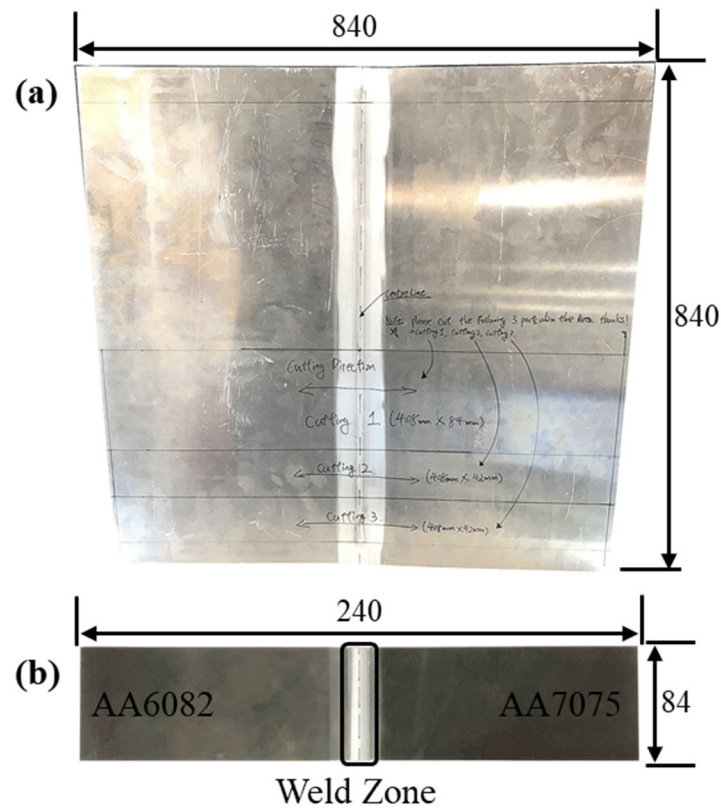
Material preparation of DA-TWBs (a) original dissimilar alloy tailer welded blanks and (b) design of blank for U-shaped forming (dimensions are in mm).
